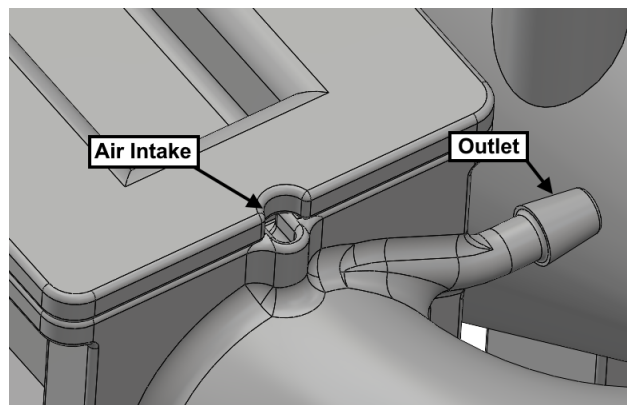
Inlet air intake with lid placed onto the testing chamber.
